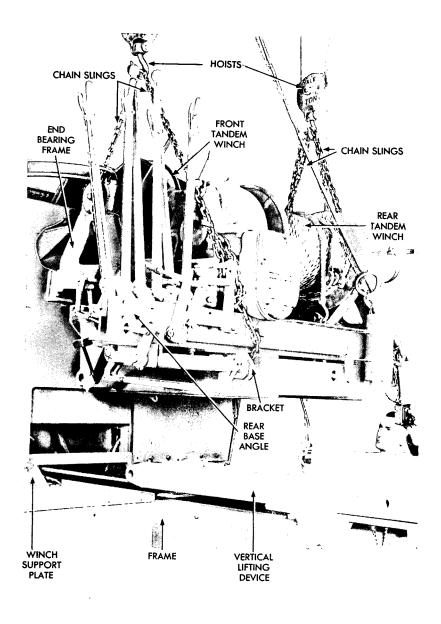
Positioning Tandem Winch Universal Joint Assembly for Removal of Winch Assembly
